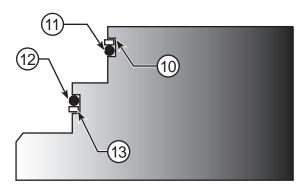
Fit o-ring (11, 12) and back-up ring (10, 13) onto the piston (11).
